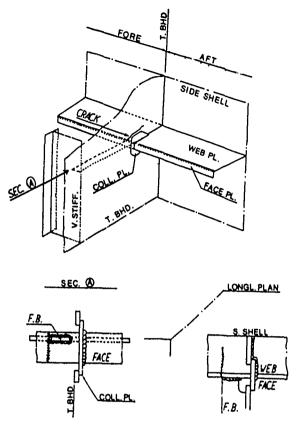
Side Shell Longitudinals Cracks at Transverse Bulkheads
